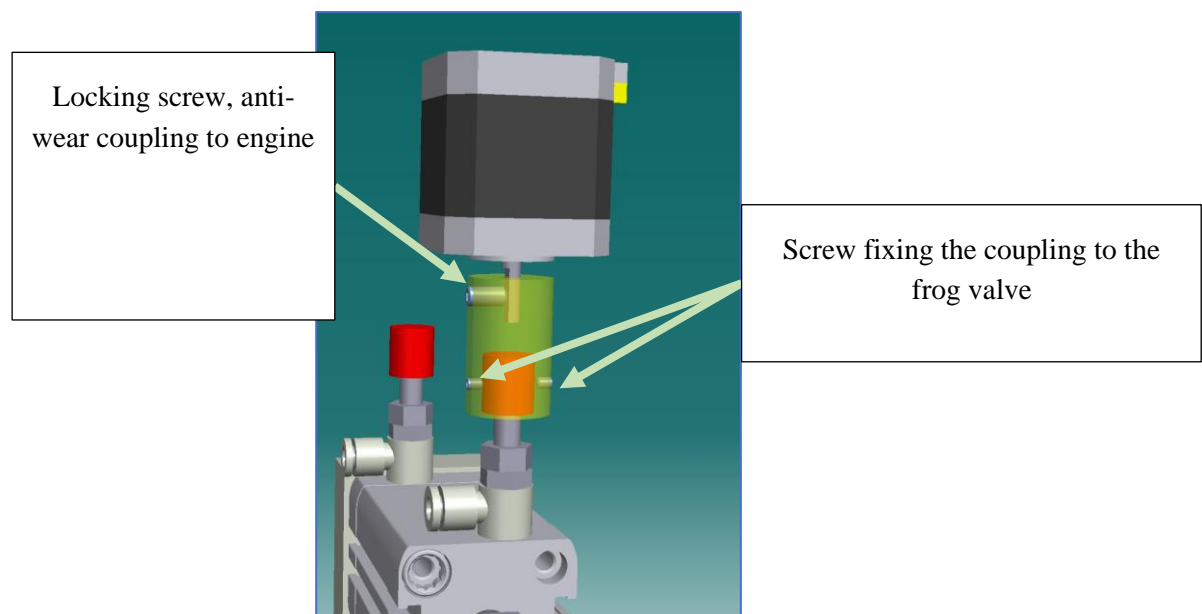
Drosel - coupling - motor assembly realised in Catia
